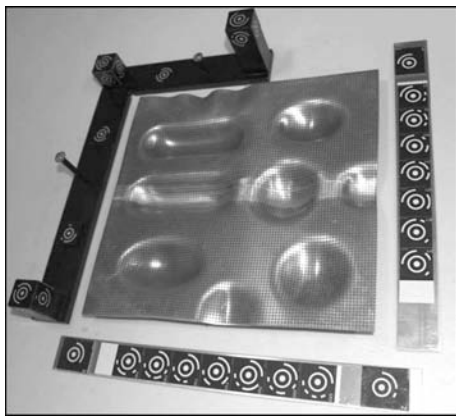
Workpiece 2.5 m in size as realized with a shape designed on the forming limit edge
